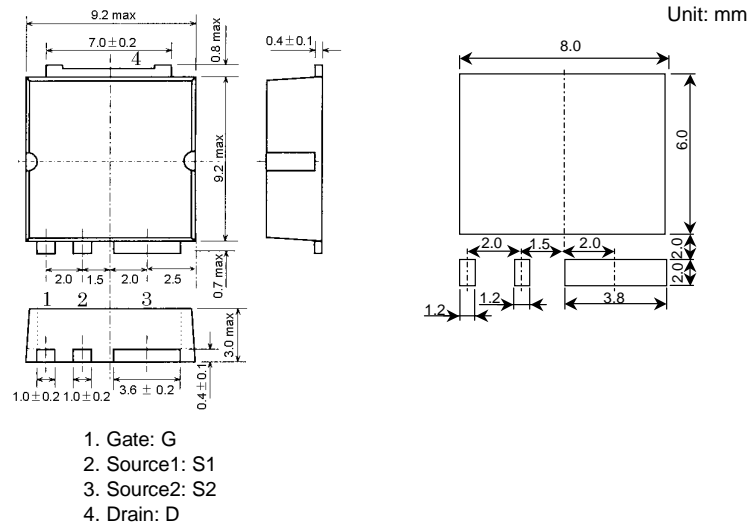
Minimum Pad Dimensions for a TFP Package
